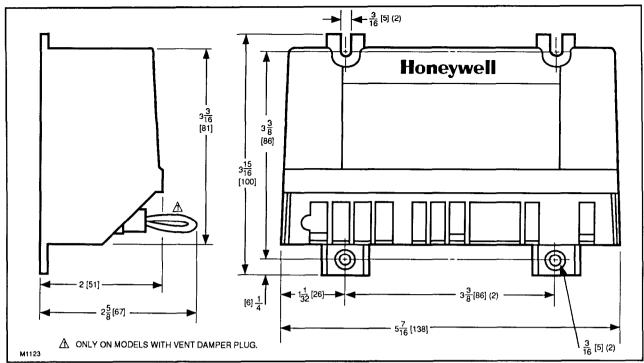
APPROXIMATE IGNITION MODULE DIMENSIONS IN in. [mm].
